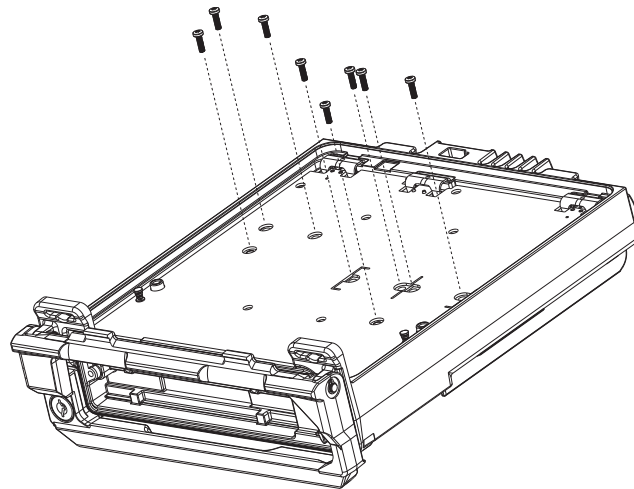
Installing the PA Screws (HP/MP radio shown)
